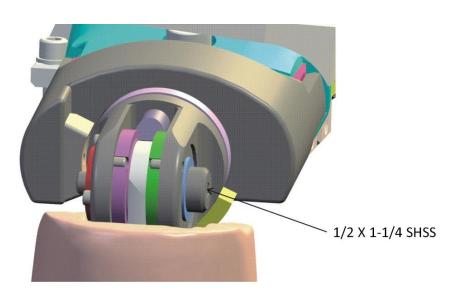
Remove the arm from the shoulder yoke assembly
